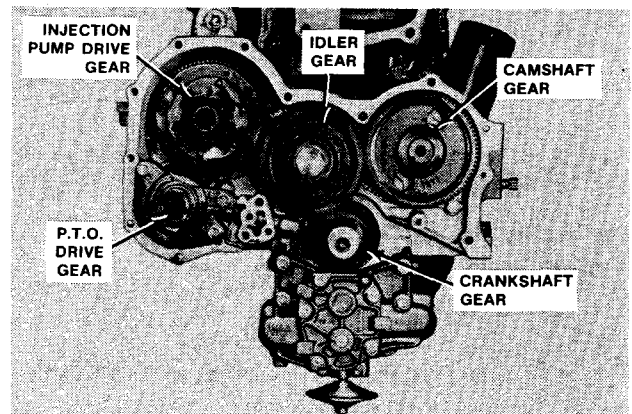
Timing Gear Assembly - Cover Removed (SSD-655)
